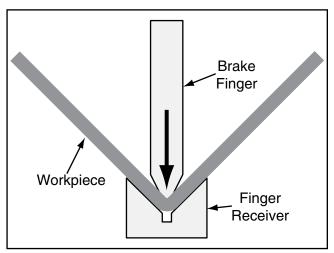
Side profile of brake fingers and receiver making 90° bend in workpiece.
